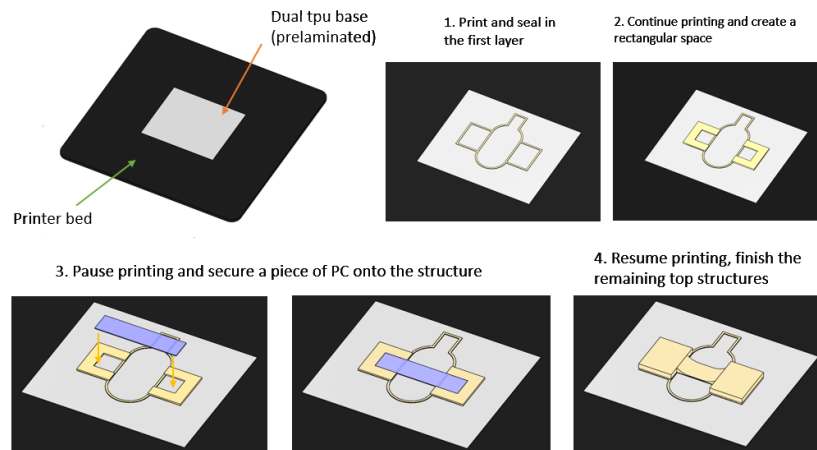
Schematic of the filament welding process with support layer over pouch motors.
